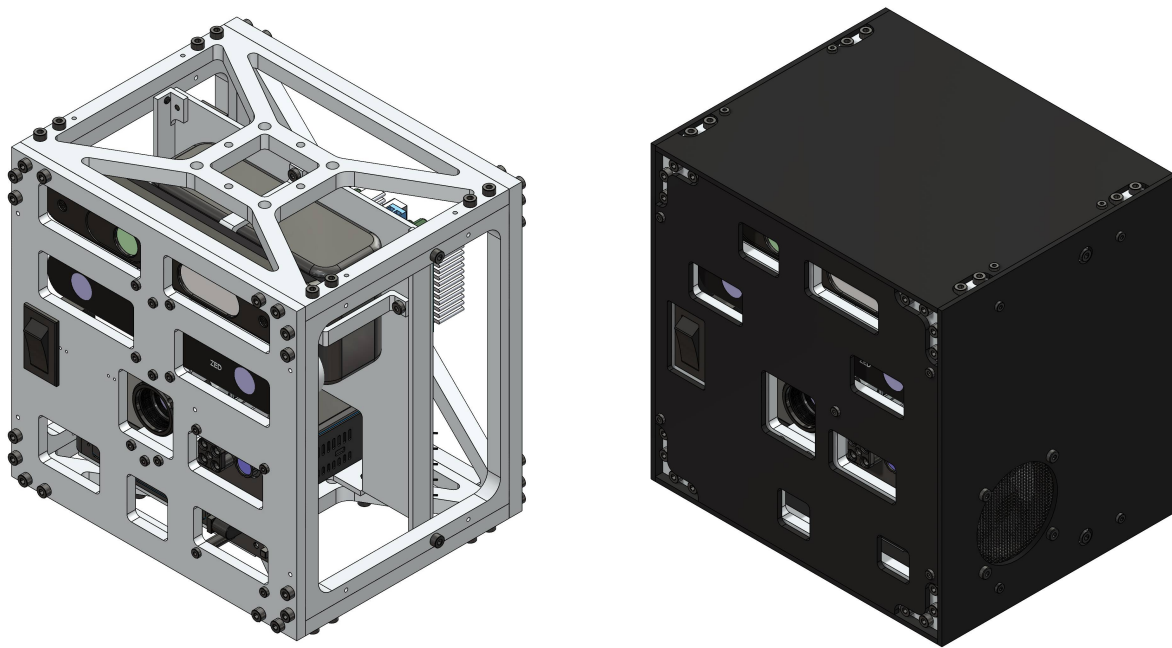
Isometric view of NEST without optional siding panels installed (left); isometric view of NEST with optional siding panels installed (right).
